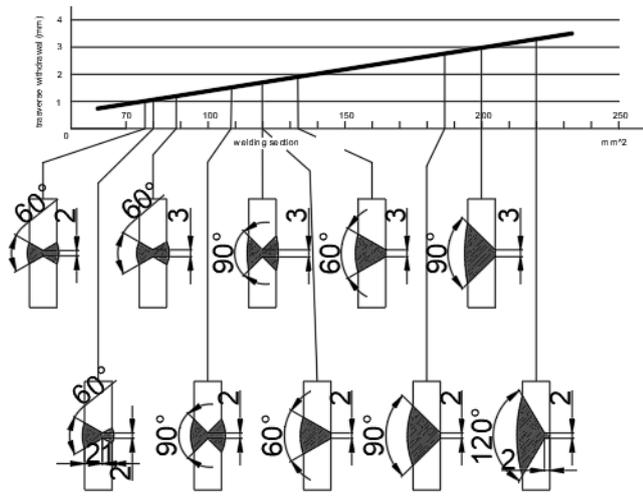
Transverse withdrawal of butt-welded specimens, as a function of the welding section.
